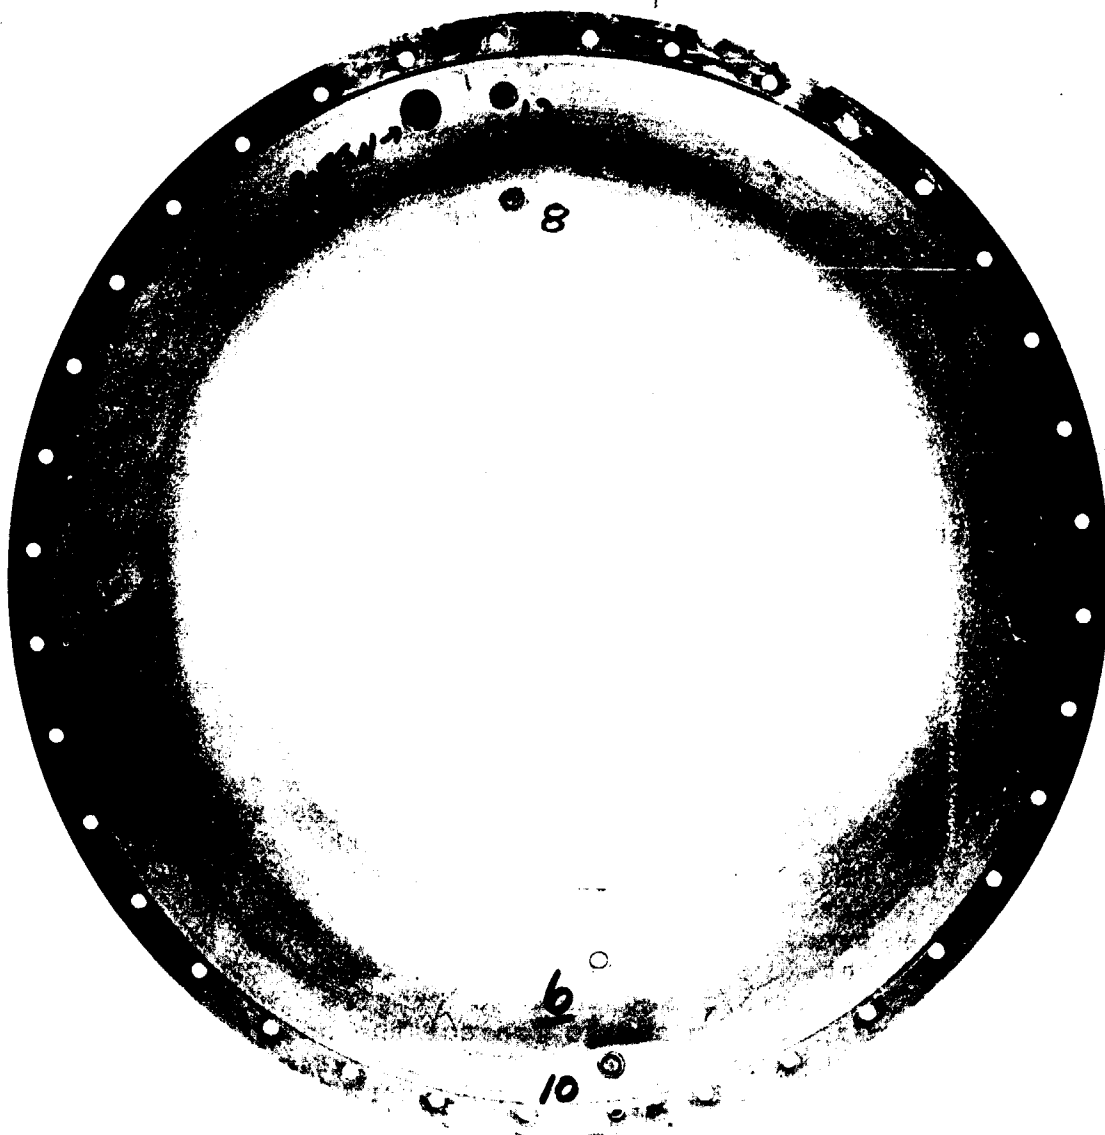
High-Pressure Compressor Shroud Showing the Location of the Replaceable Shoe and the Six Clearance-Measurement Probes
